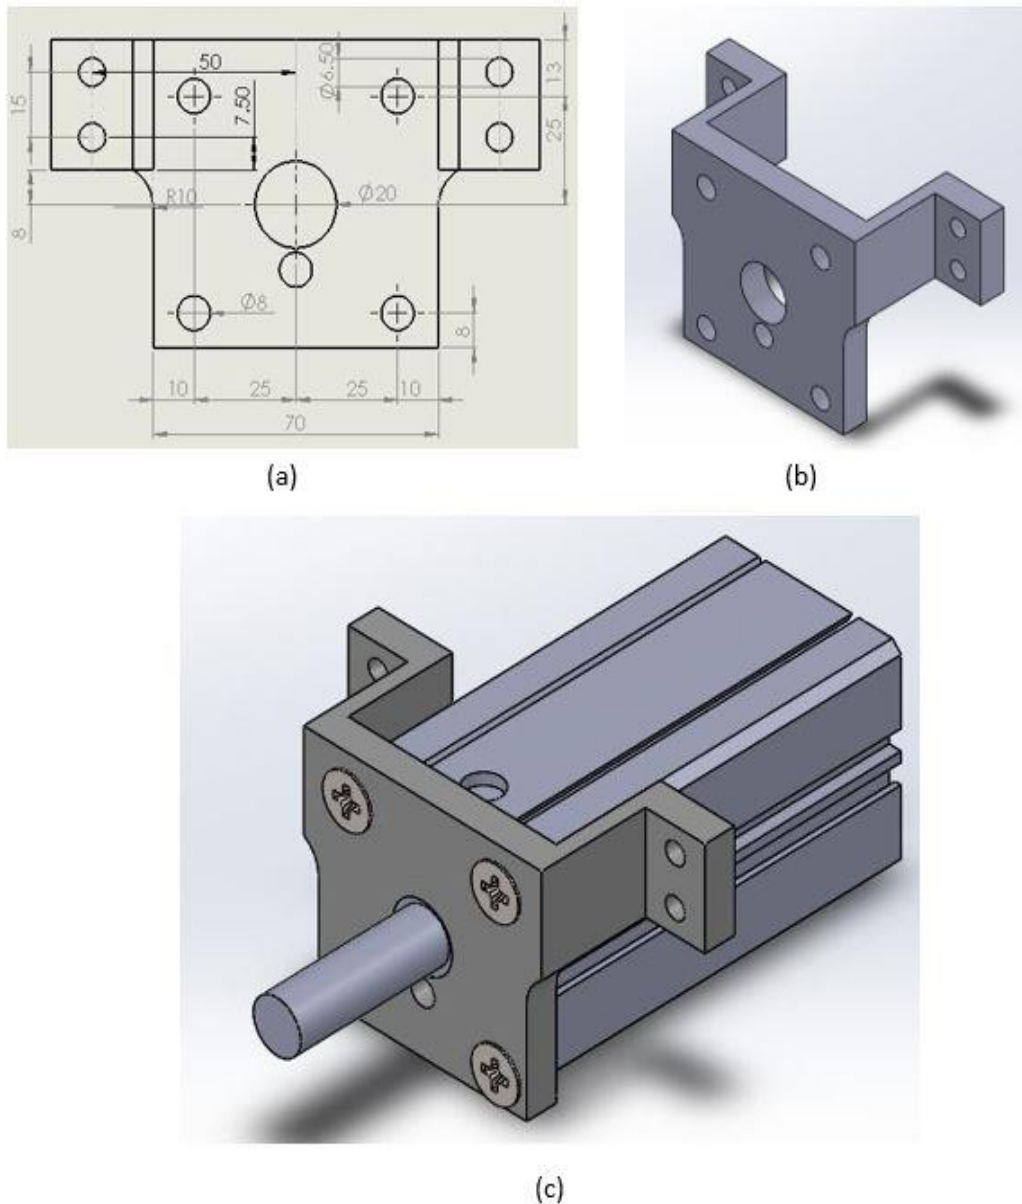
(a) Sketch of Cylinder Holder (b) 3D CAD model of the Cylinder holder in isometric view (c) Cylinder holder strapped around a pneumatic cylinder (visual representation of its function).
